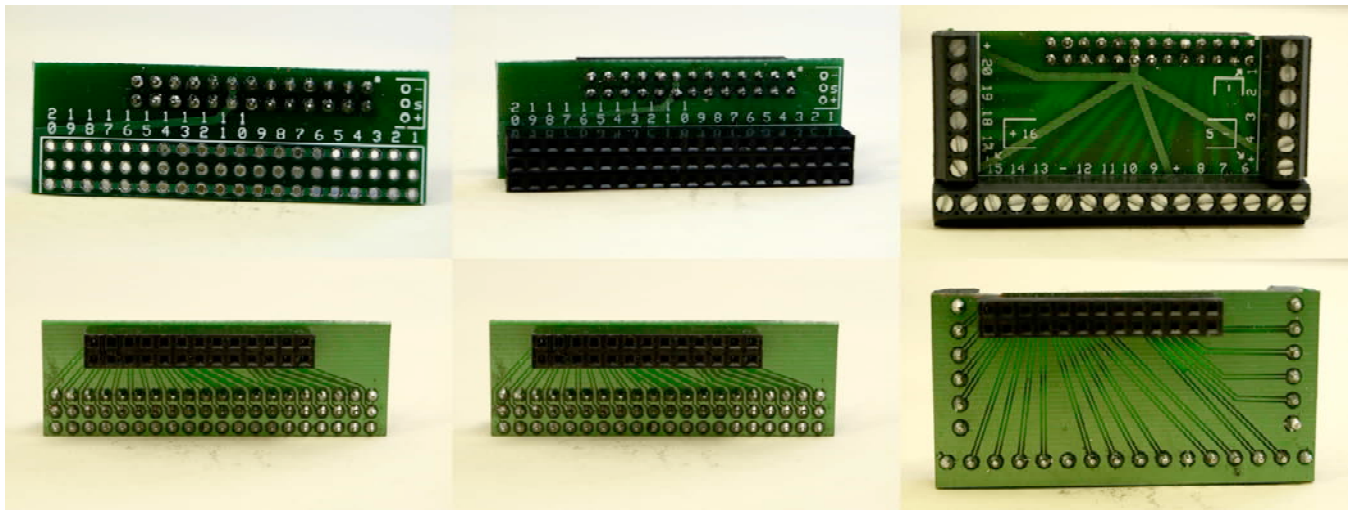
Connector boards front and back (L->R: solder, 3-pin, screw terminal)
